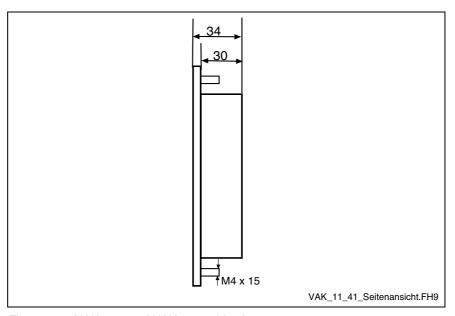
VAK 11.2 and VAK 41.2, side view
